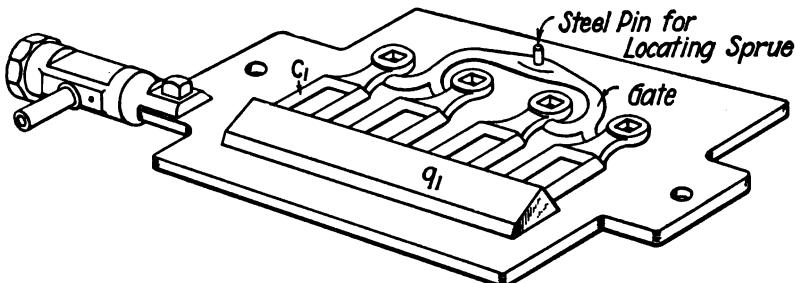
Match Plate for Cope Mold with Vibrator Attached
